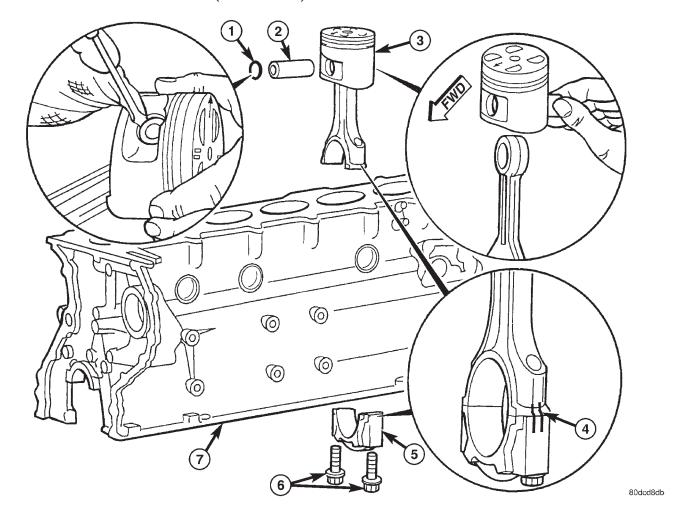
PISTON AND CONNECTING ROD ASSEMBLY
